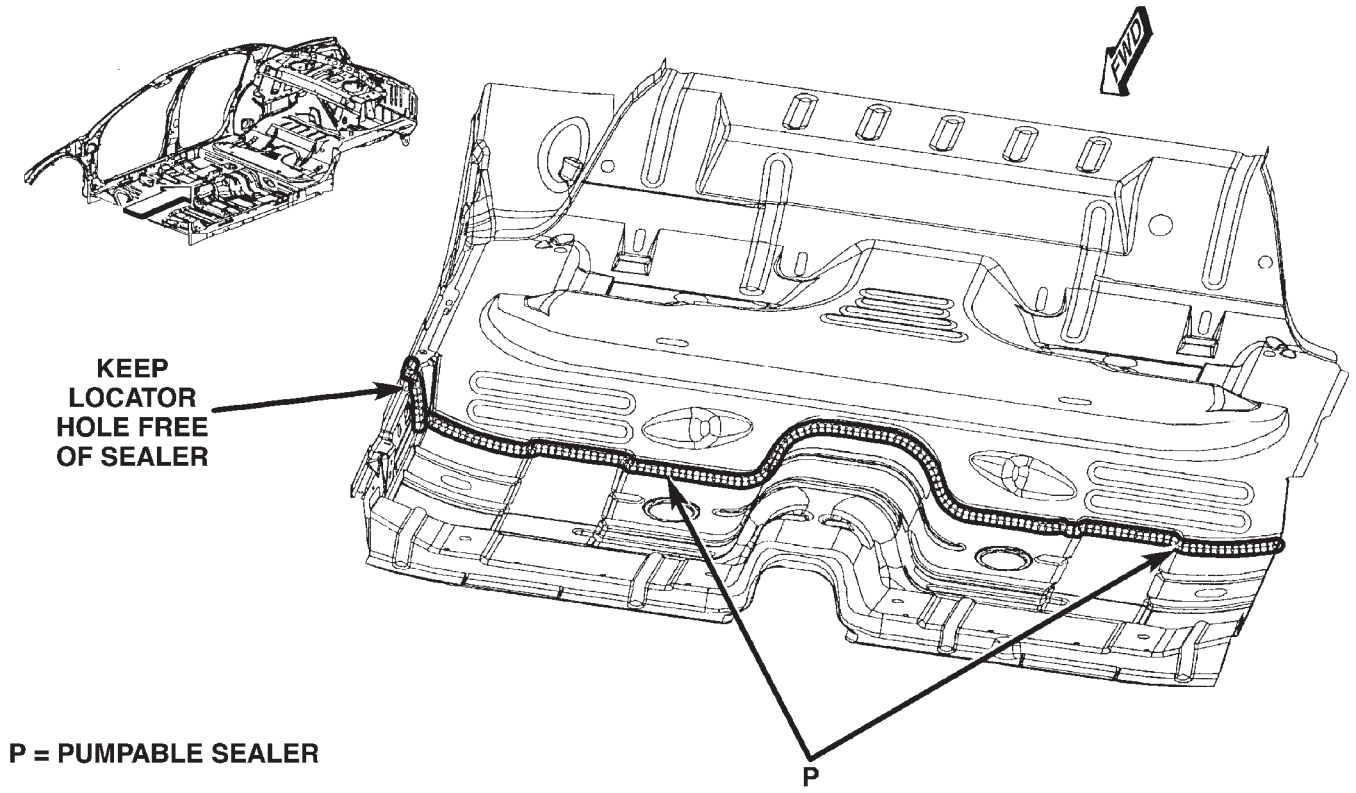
FRONT FLOOR PAN TO REAR FLOOR PAN
